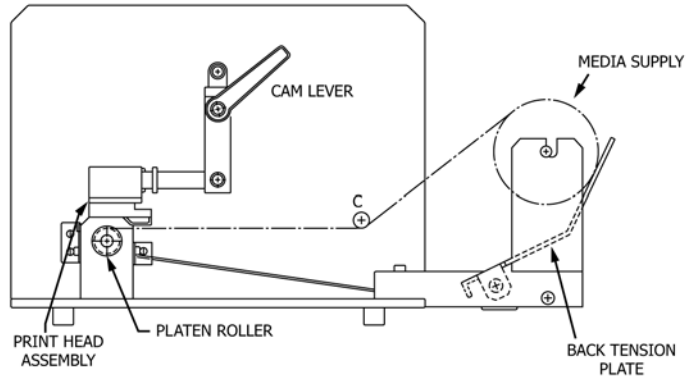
Atlantek Model 200 (Side View) Test Specimen (Media) Loading—Roll Form
